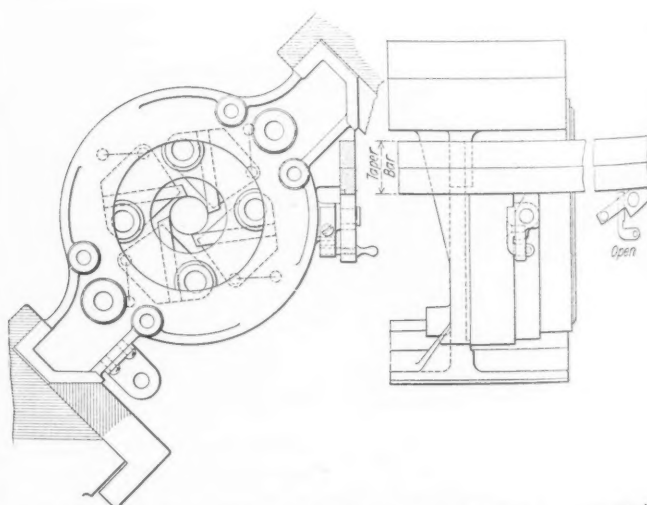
View of Cutter Head Showing Relation of Cutter Blades to Bolts to Be Turned
